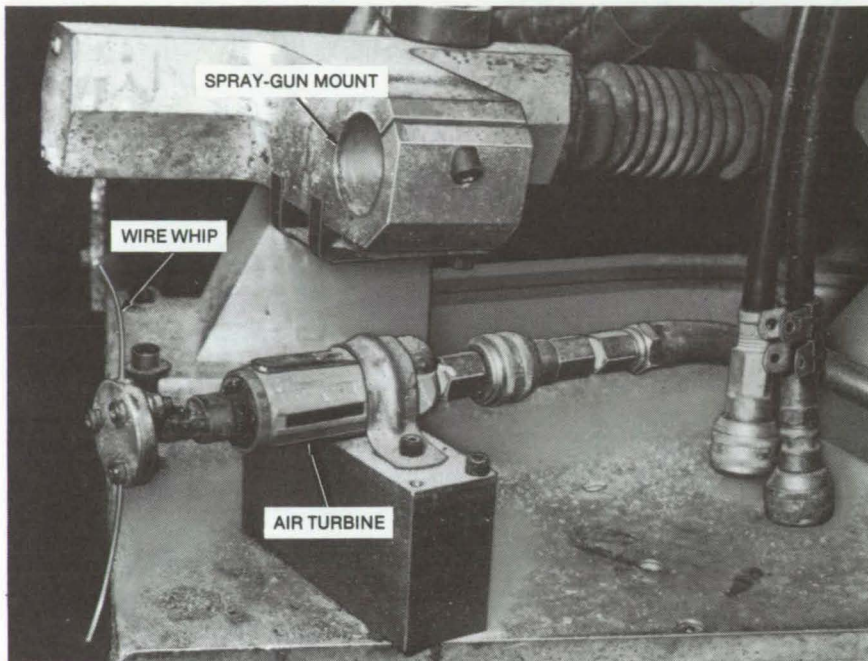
An Air-Turbine-Driven Wire Whip is clamped near the spray-gun mount. When the spray gun is installed, the wire whip is in position to remove foam buildup from the nozzle face. Two lengths of wire 1 to 2 inches (2.5 to 5 cm) long and about 0.03 inch (0.8 mm) in thickness are used.
